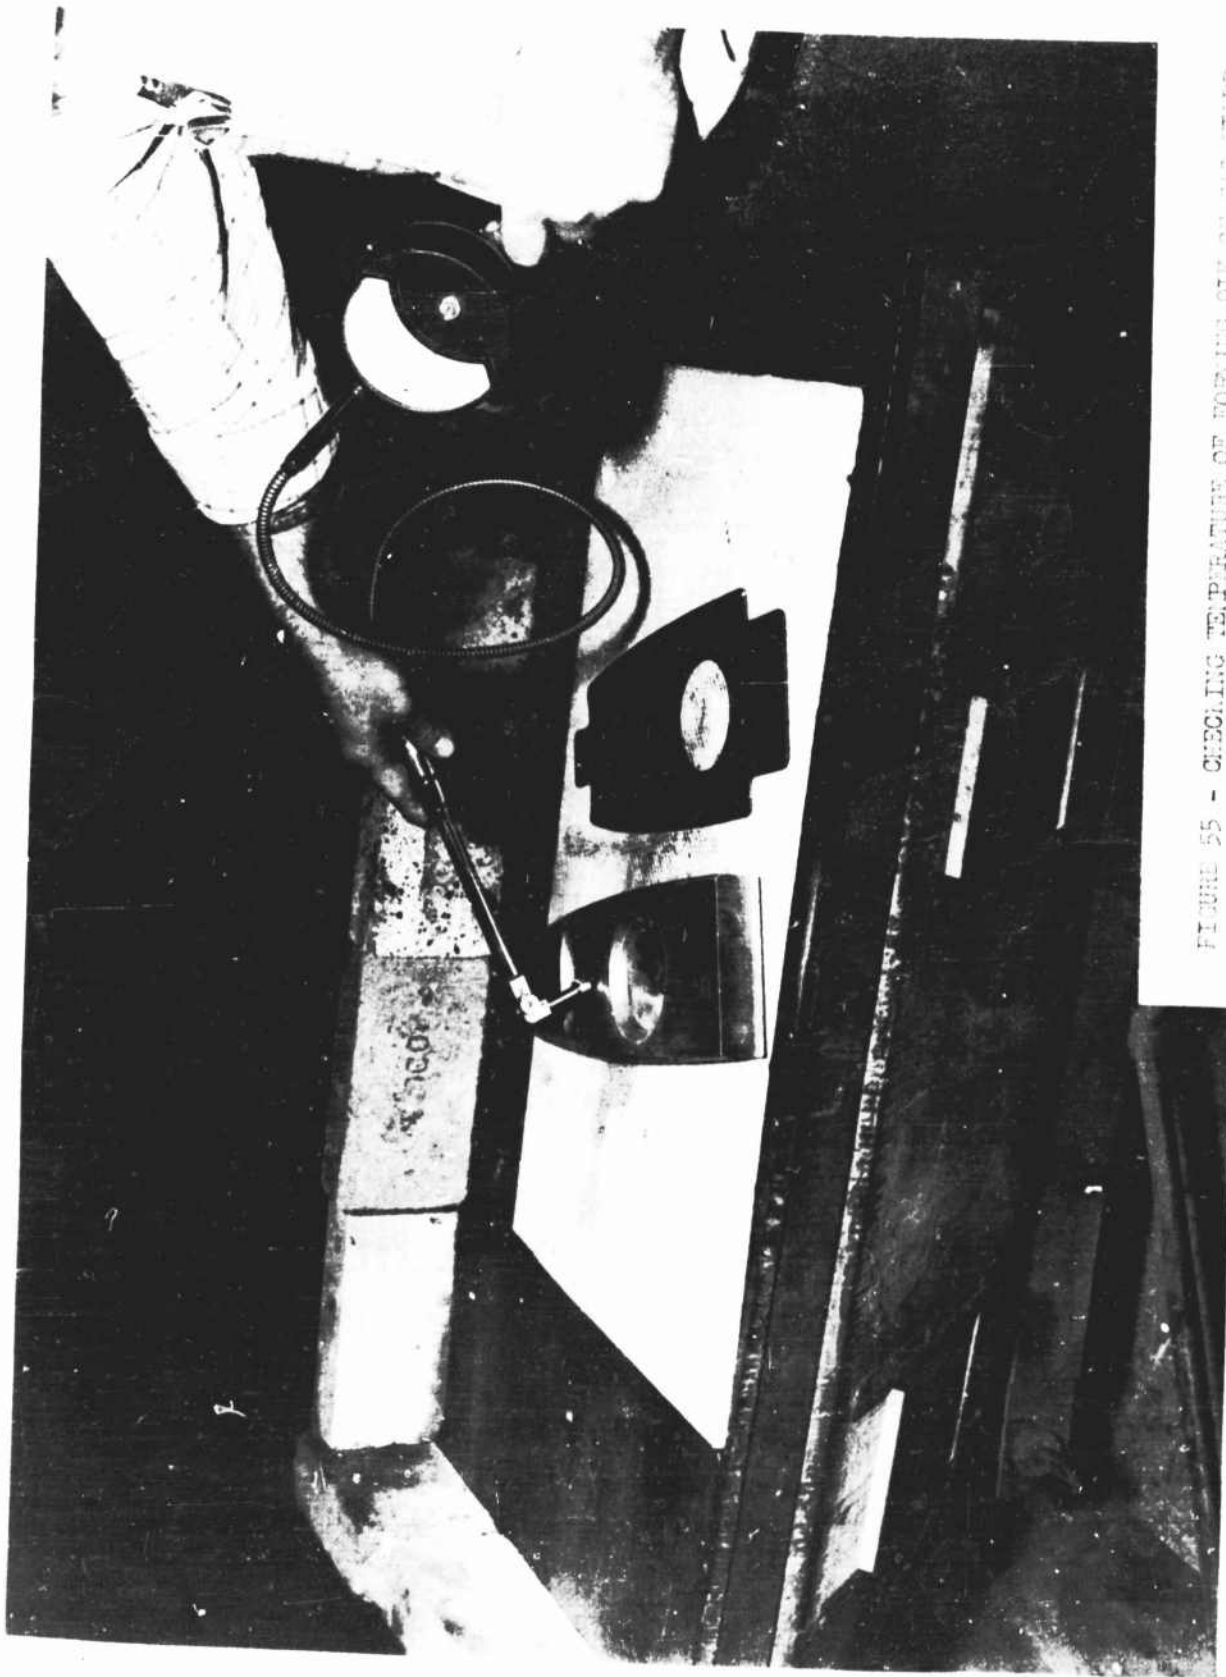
CHECKING TEMPERATURE OF FORTING DIE ON ITS HEATED HOT PLATE WITH CONTACT PYROMETER
